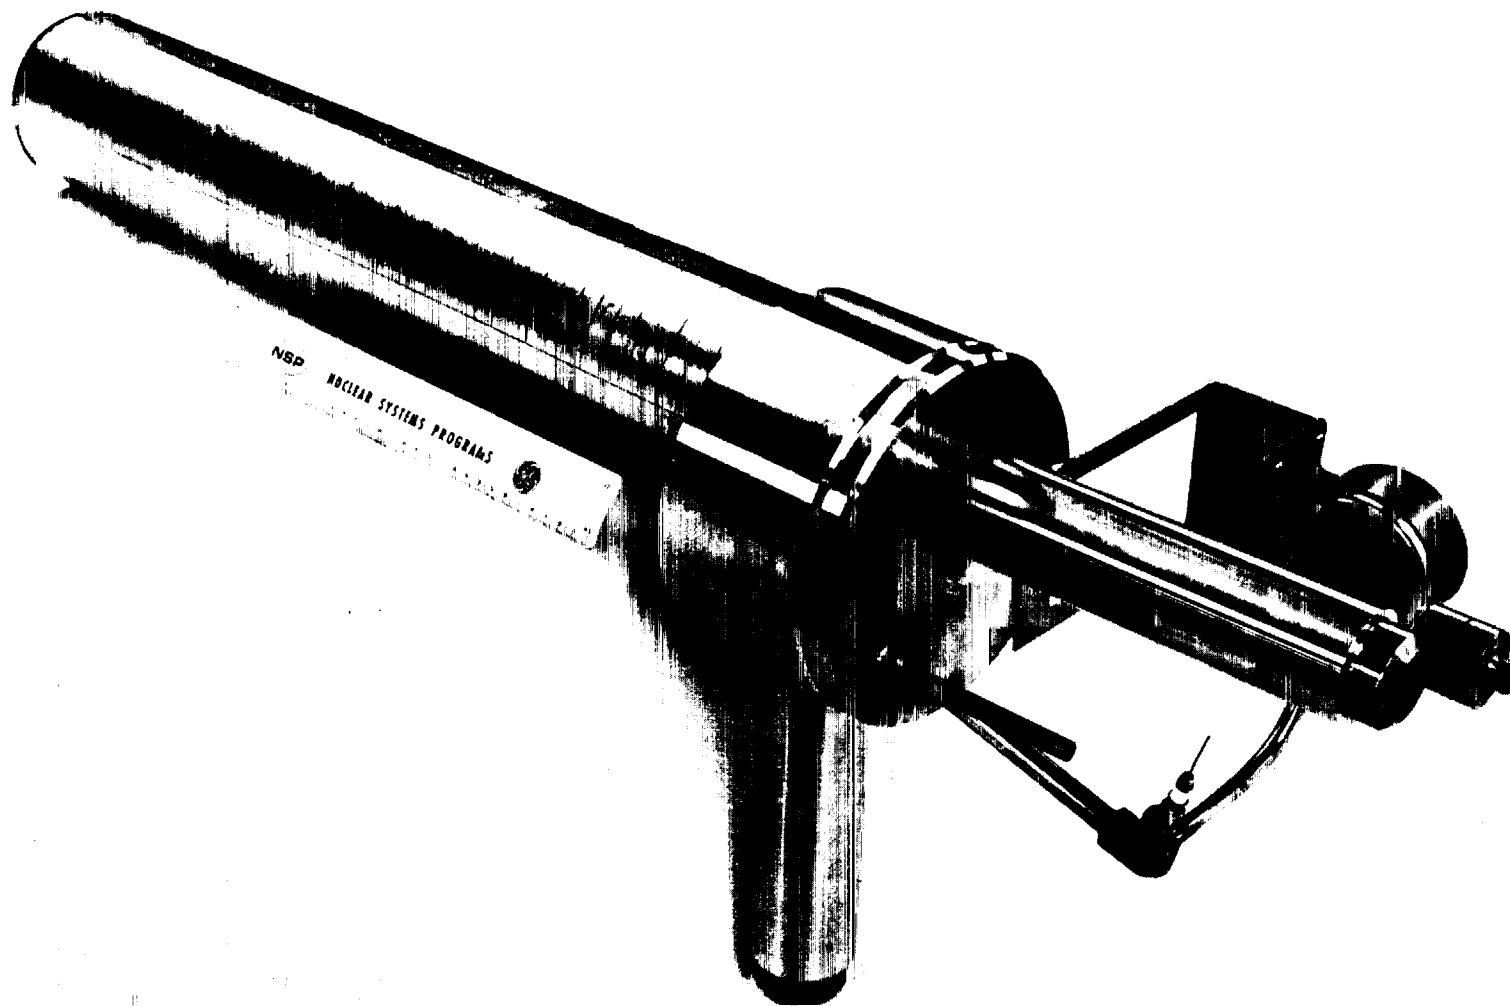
Insulated Pump Duct with Duct Shroud and Instrumentation, and Pipe Sleeves, Tacked in Place Ready for Final Welding.
